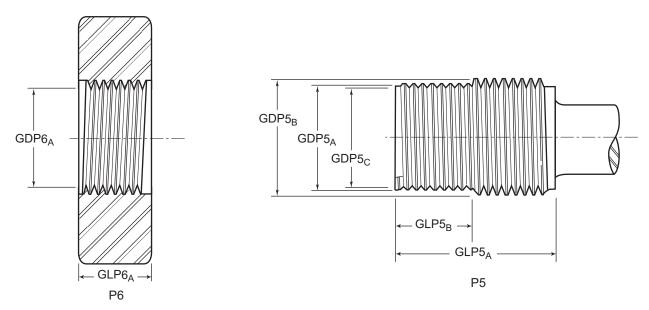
No-go Pin-thread Gauges (For Gauging Sucker Rod and Polished Rod Pin Connections)
